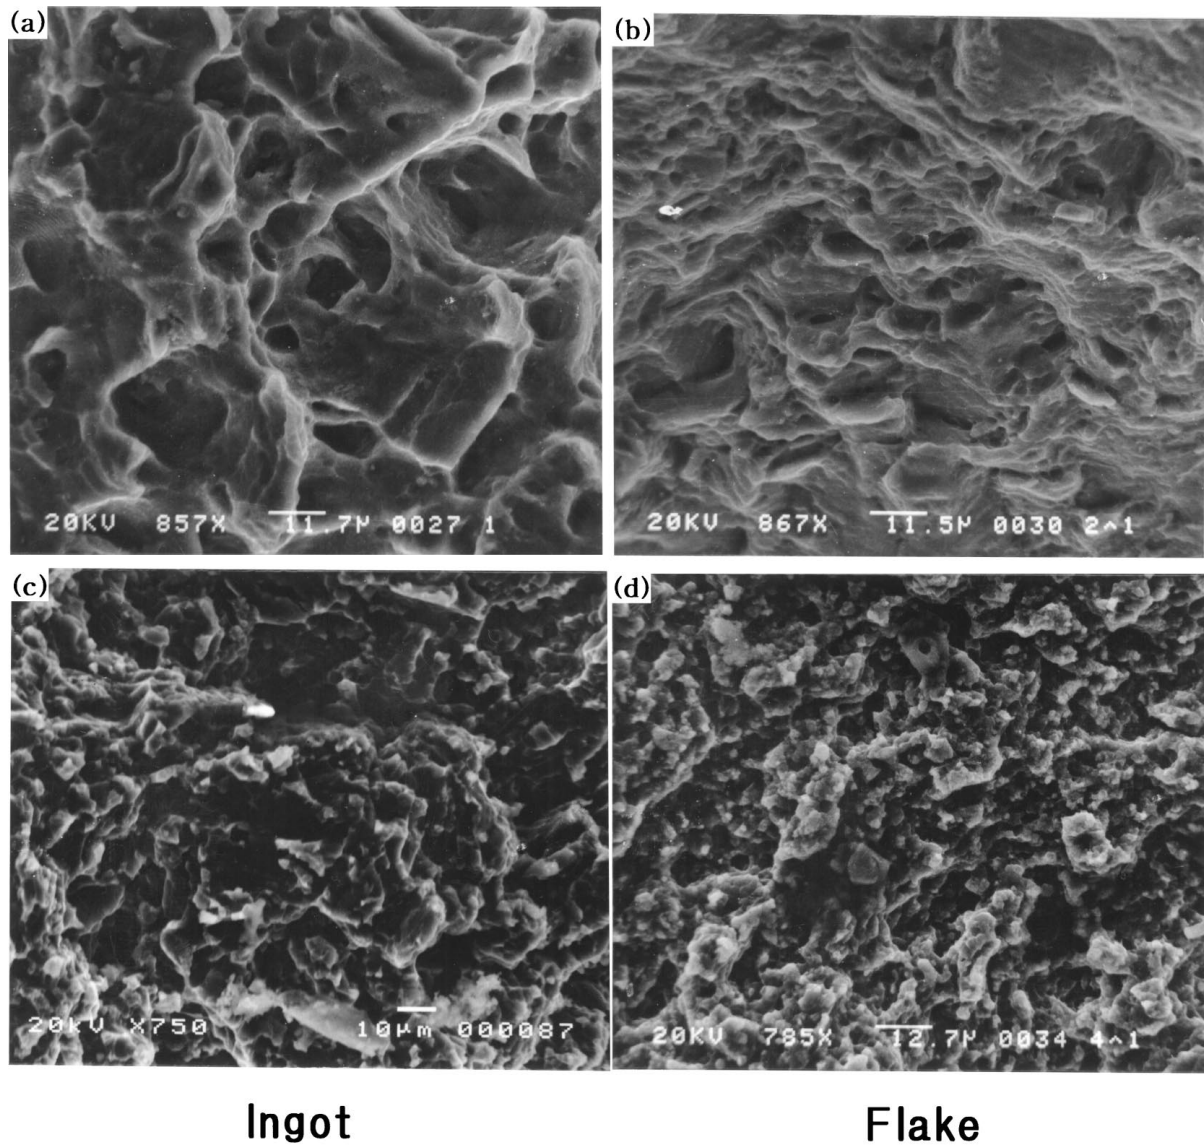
Fracture surfaces of the Mg-5Al and Mg-15Al extrusions from the ingots and flakes. (a) and (b) Mg-5Al, (c) and (d) Mg-15Al.
